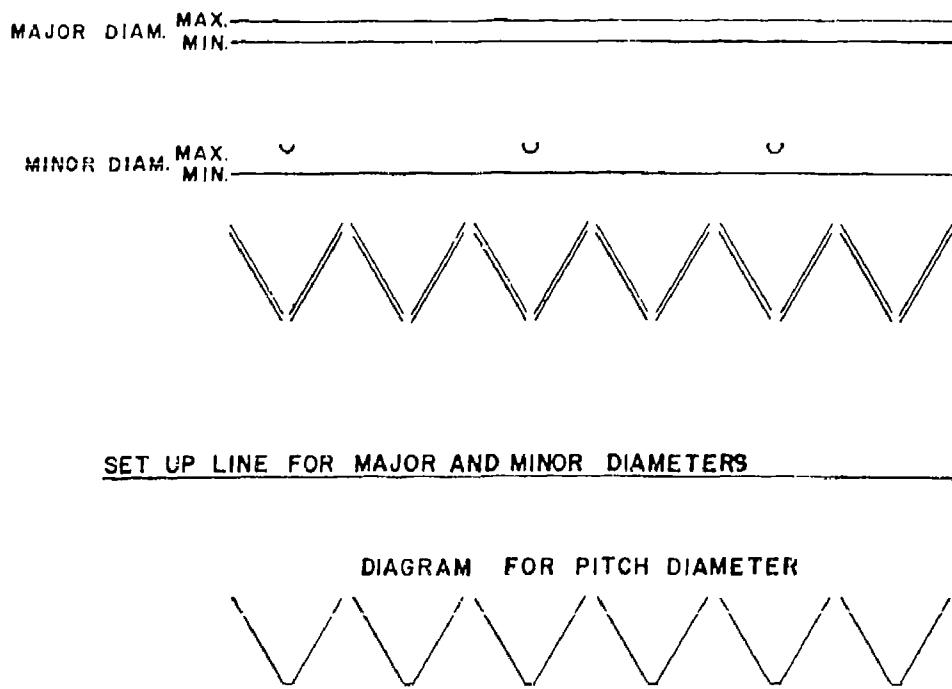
Suggested chart for projection inspection of external National Miniature threads.
